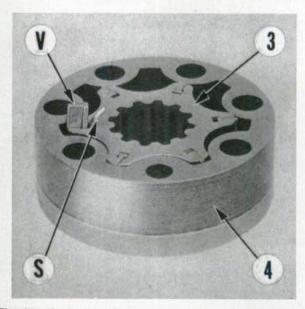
Arched back of springs (S) must contact rotor vanes (V).
